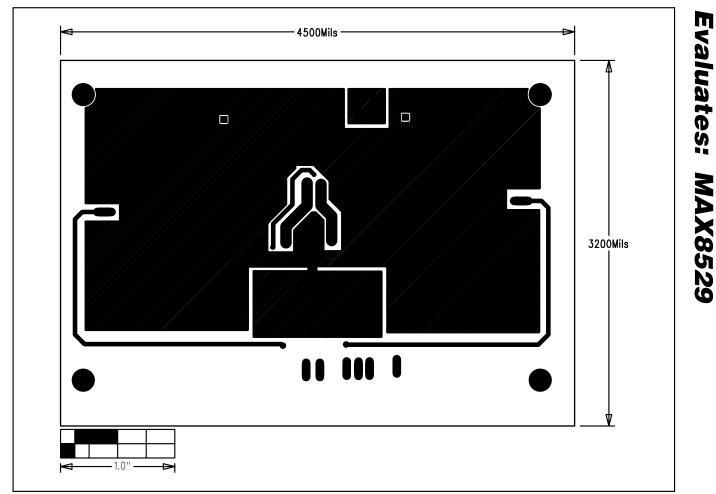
MAX8529 EV Kit PC Board Layout—Solder Side
